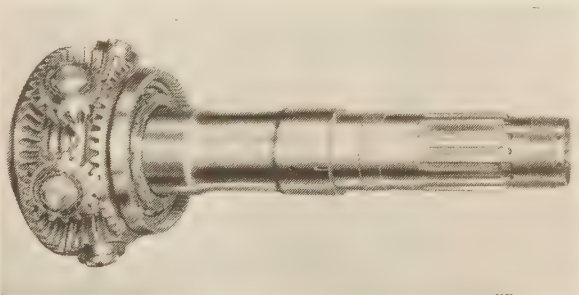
PLANETARY ANGULAR BEVEL-GEAR UNIT ASSEMBLED WITH SHAFT
